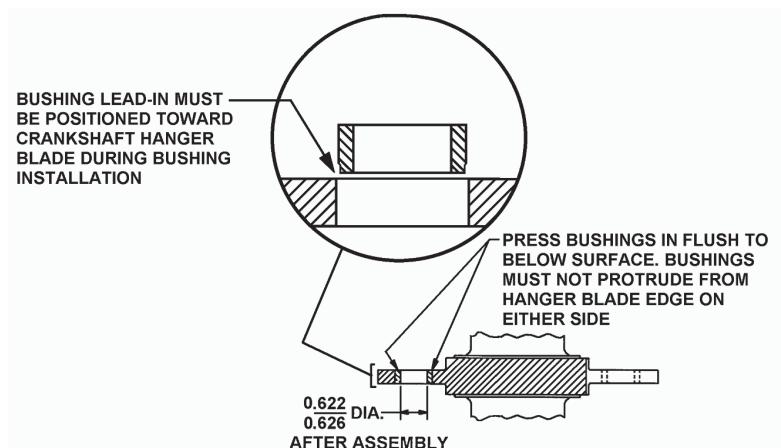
Crankshaft Hanger Blade Bushing Replacement
